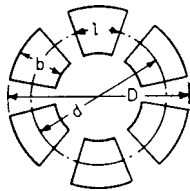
Kingsbury thrust bearing with six shoes.
